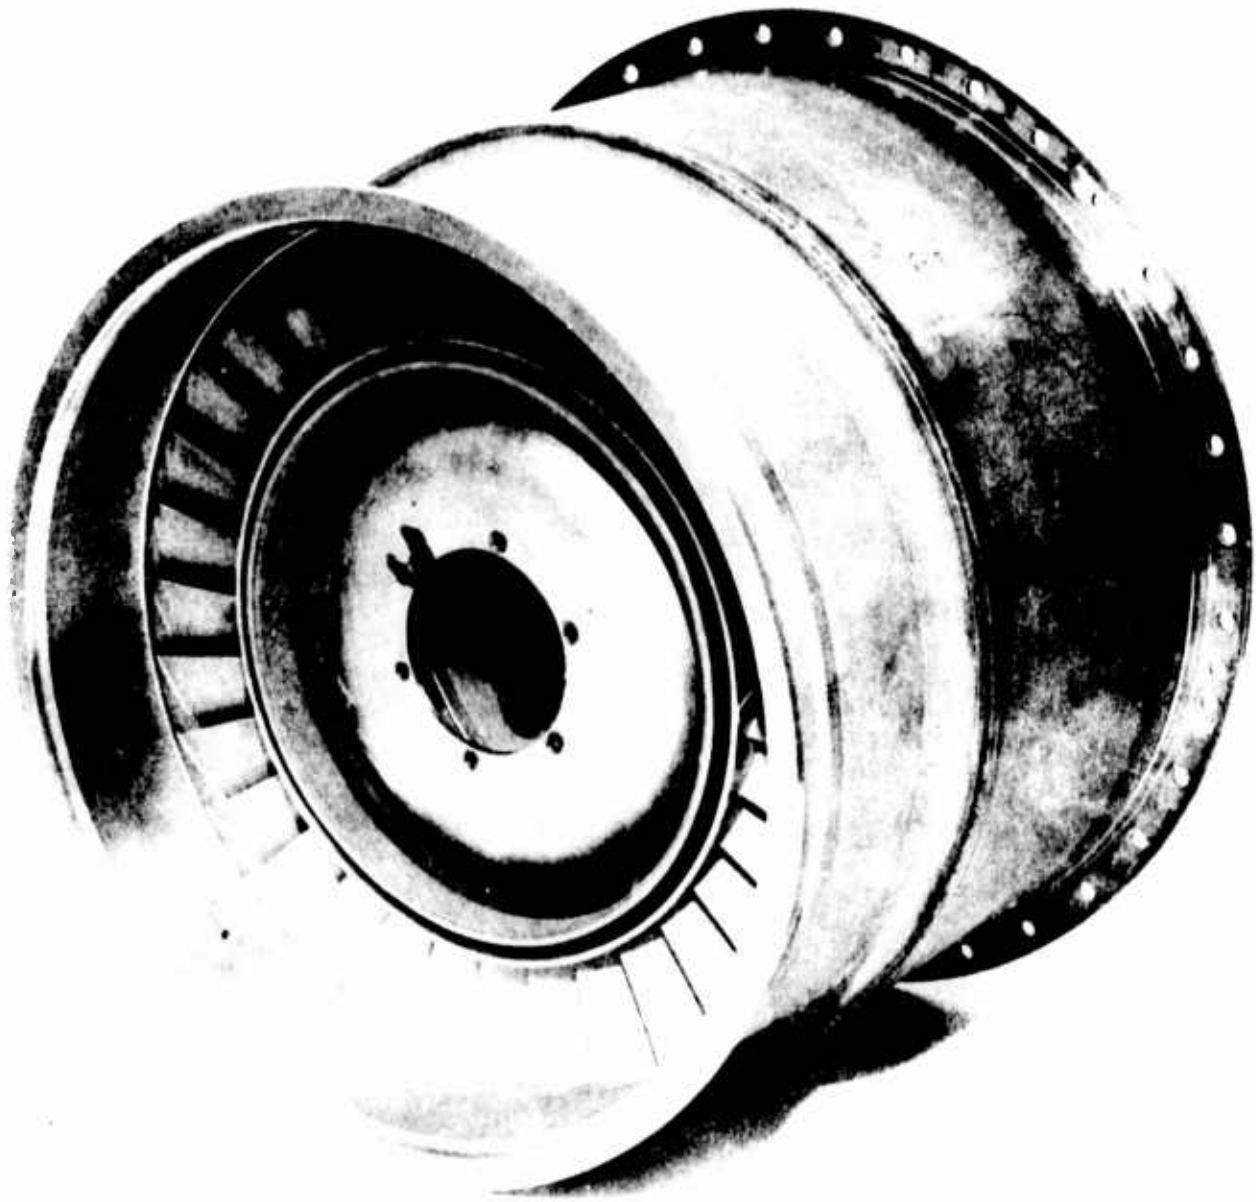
Combustor and Turbine Nozzle Assembly (Aft View).
